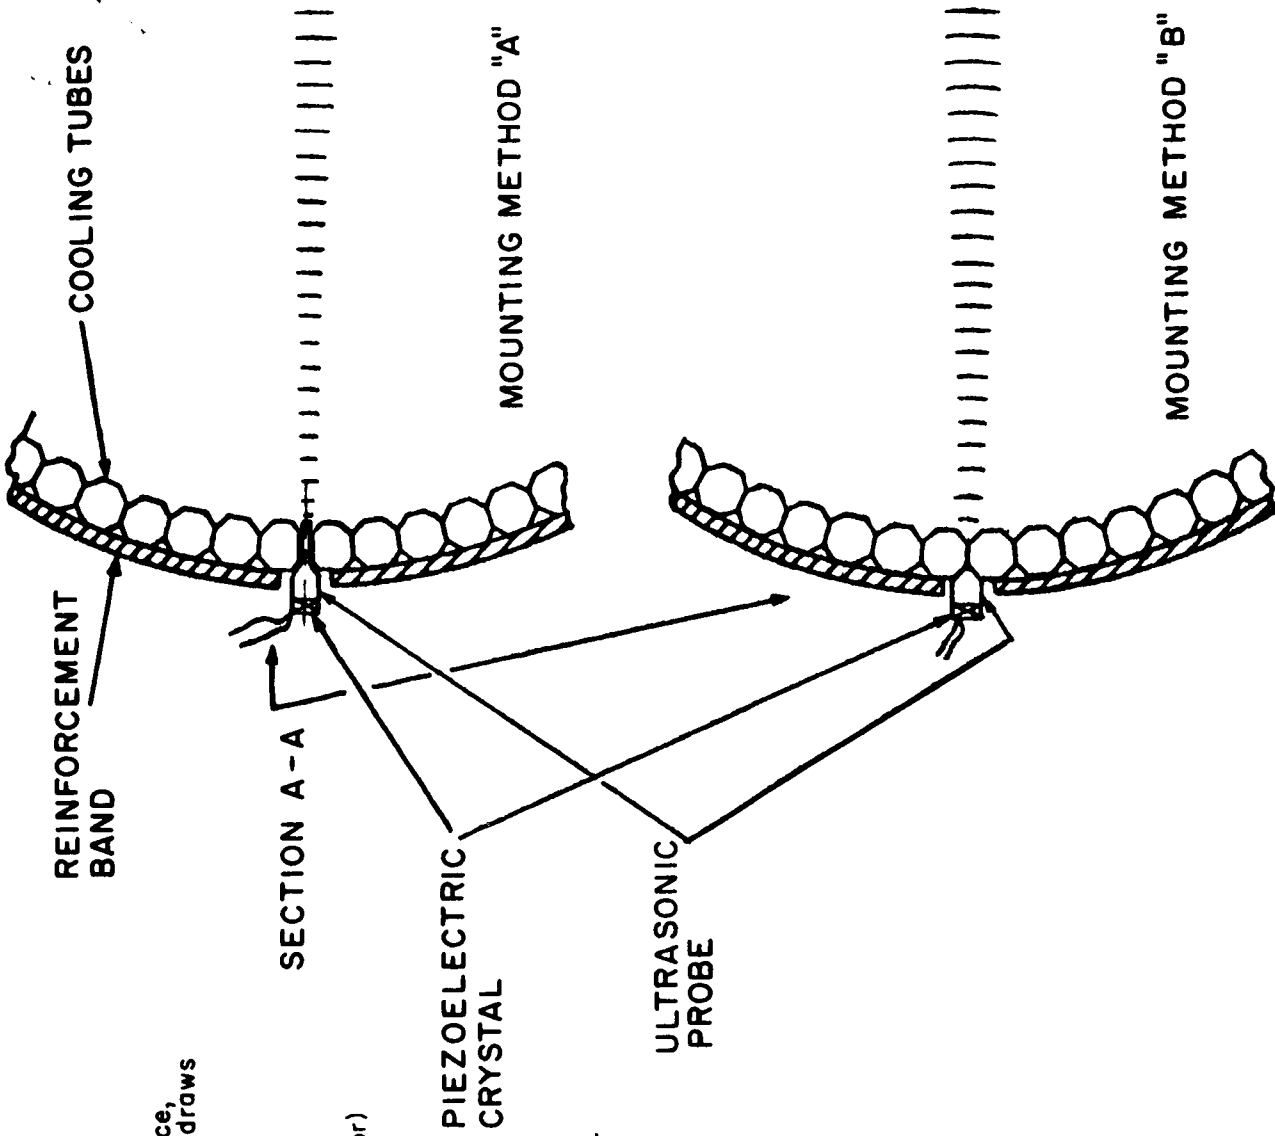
Mounting methods. Mounting method "A" employs concept of inserting ultrasonic sensing probe between cooling tubes of thrust chamber, thereby allowing probe to protrude into the interior of thrust chamber. Mounting method "B" employs concept of mounting probe on exterior of thrust chamber, but in intimate contact with cooling tubes or reinforcement band.
